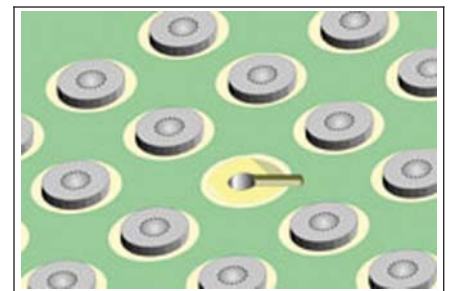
Channel or canal recessed into board to permit circuit routing to be level with board surface.
